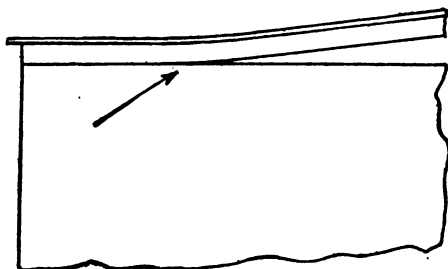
Warping of an angle-ring during the welding-on operation.
